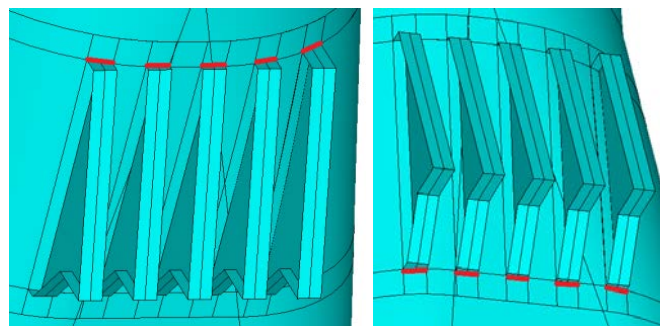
Fatigue life assessment of welded details (lines in red), containing an initial crack, where nucleation and propagation of cracks are more prone to occur at exhaust system B
